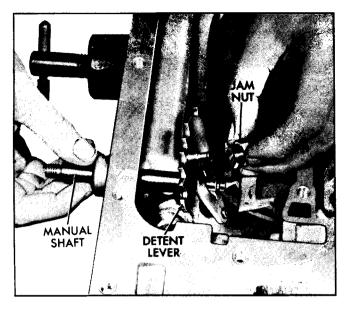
E-64 Removing Jam Nut and Manual Shaft
